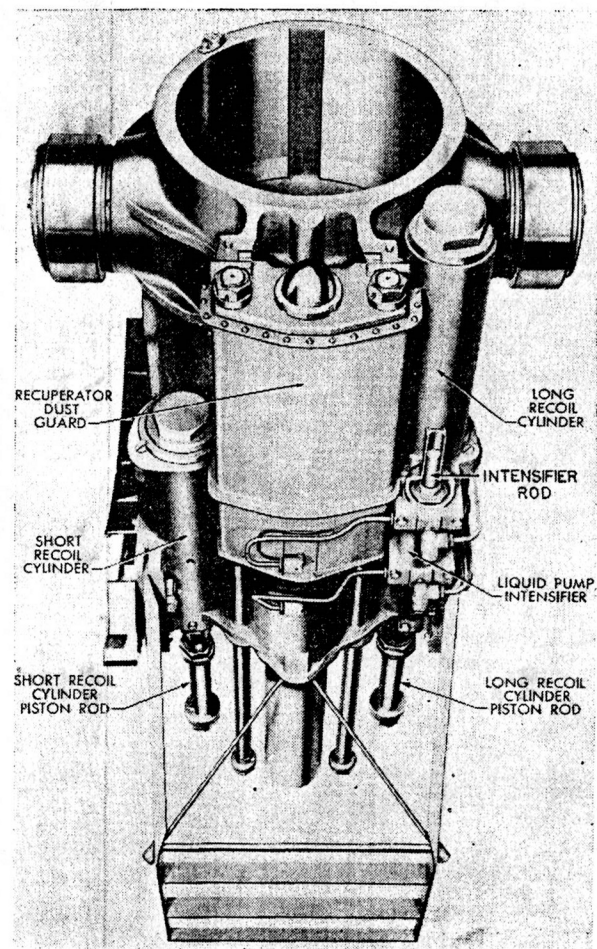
Bottom view of cradle and recoil mechanism.
